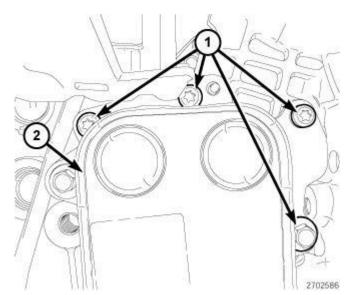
Engine Oil Cooler & Bolts Courtesy of CHRYSLER LLC
